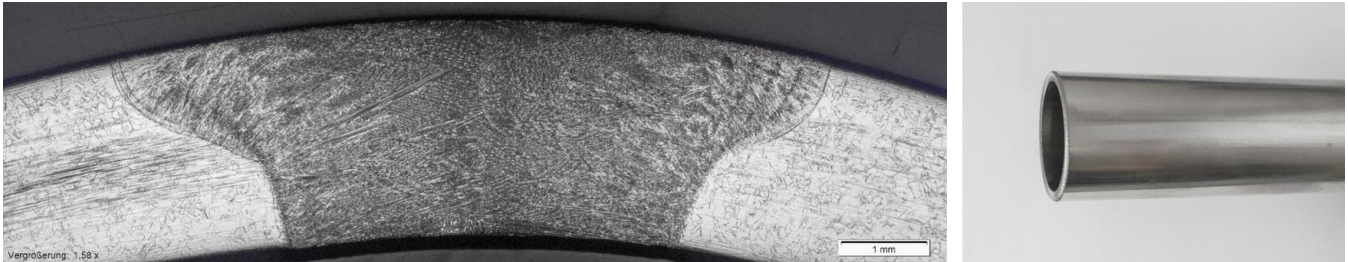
Microscopic micrograph of a TIG weld UNS N08034 (left) and an overview picture of a welded tube UNS N08034 (right)²⁸
